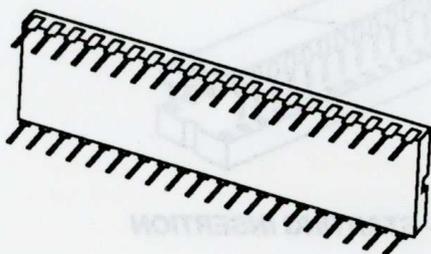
BOTTOM VIEW OF 40-PIN CHIP
